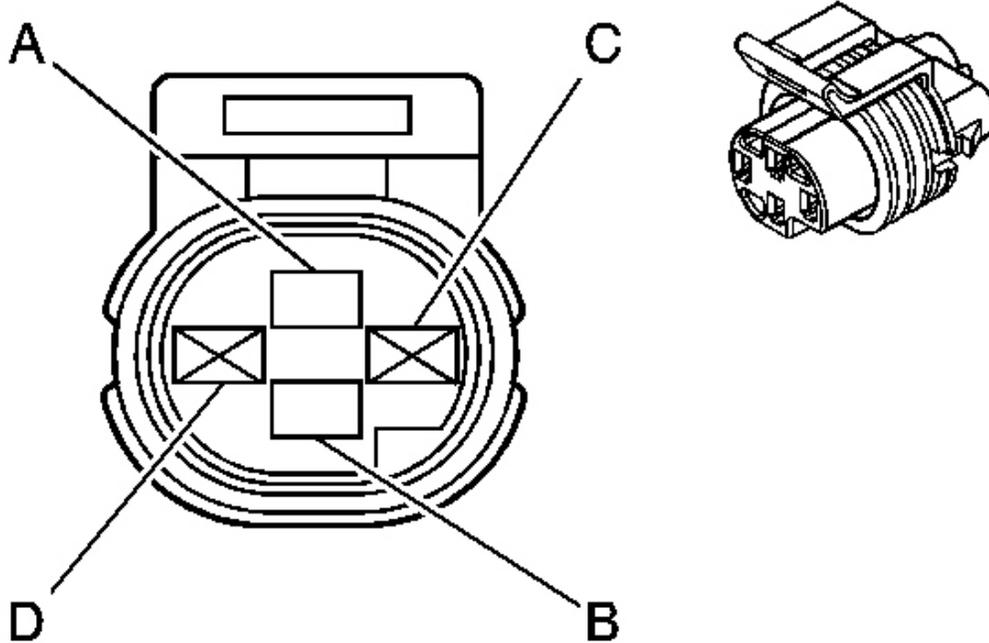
Engine Oil Pressure (EOP) Switch (LY7) Connector End View
